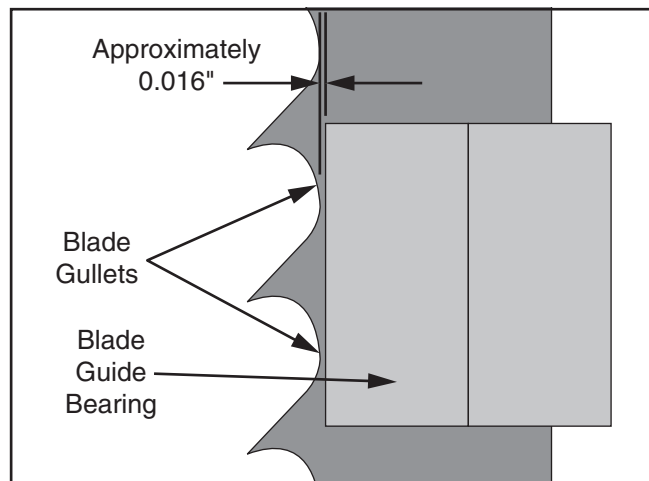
Blade guide bearing positioned just behind the blade gullets.
